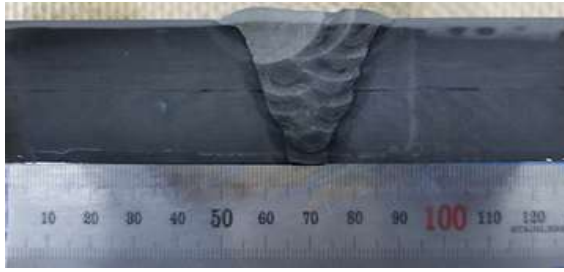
Macrostructure of unconstrained weld specimen
